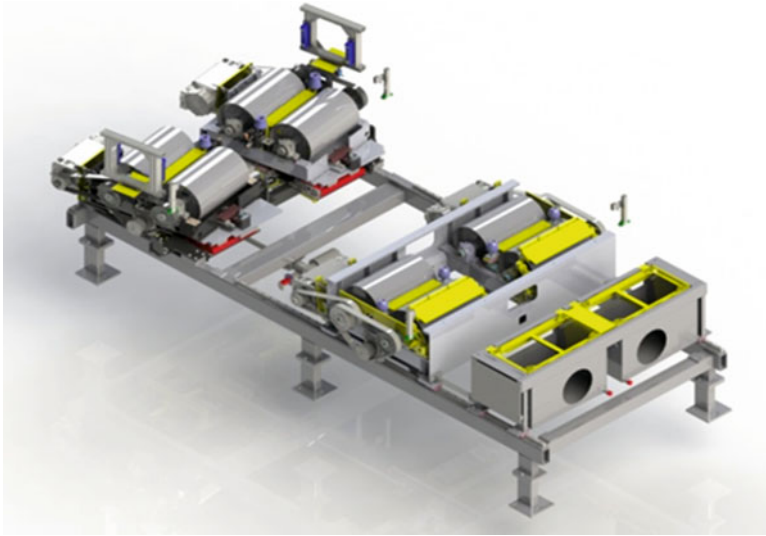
DÜRR X-Road-Curve Test Bench platform 3D-CAD drawing
